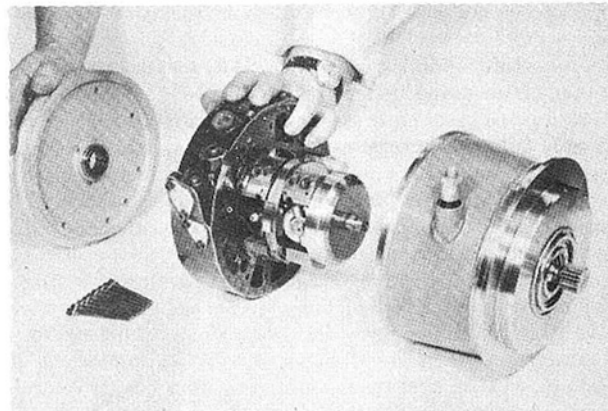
Prototype English Electric 12 kVA constant speed alternator drive
